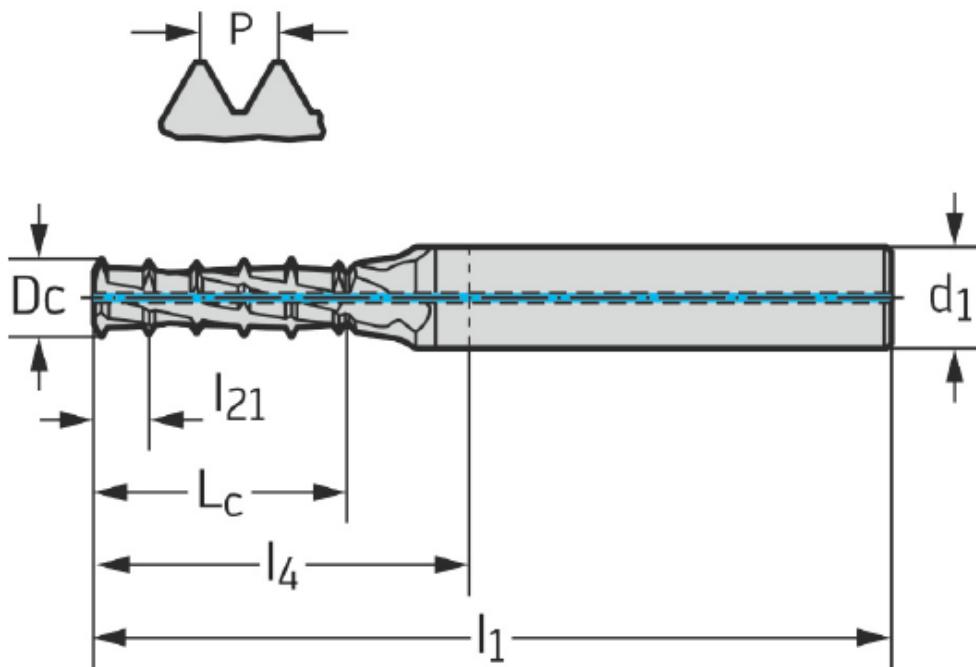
Parameters of solid thread milling cutter by Walter Tools [80].
